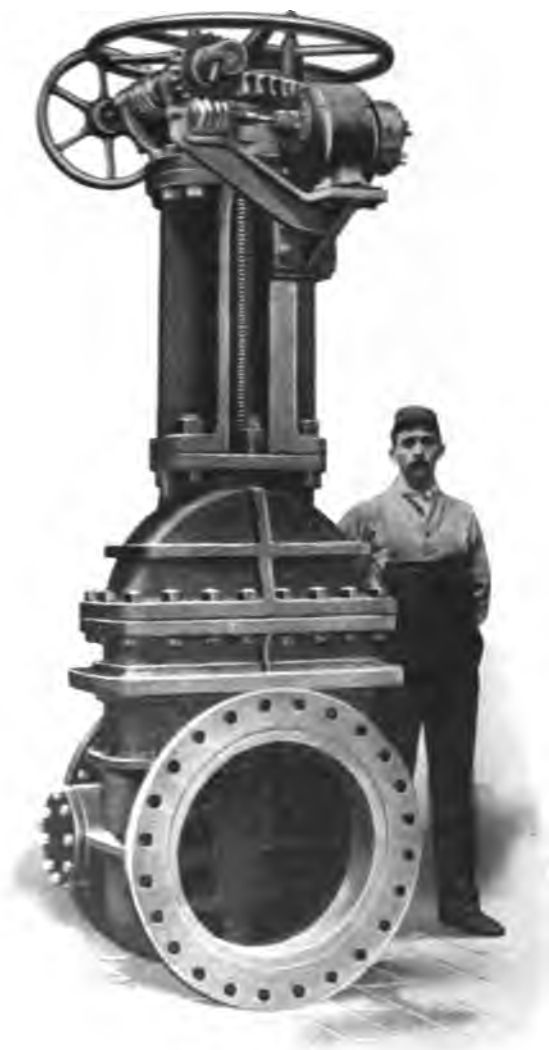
A 24-Inch Gate-Valve of Single-Disc Type, with Outside Screw and Yoke and Rising Spindle. Arranged for operating by electric motor, and provided with roller bearings to take thrust from stem.
